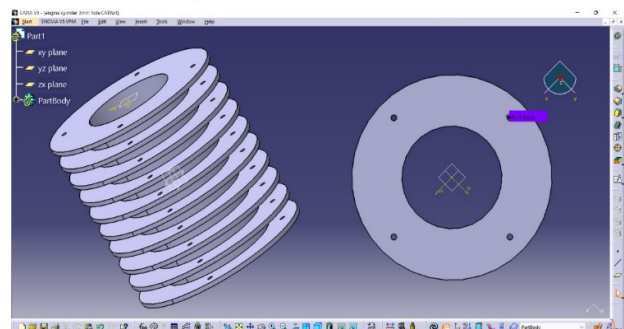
Geometric dimension of the cylindrical block having circular fins with 3 mm circular hole.
